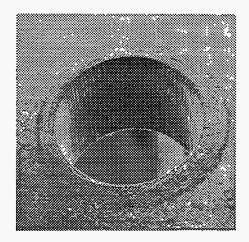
Hole Drilled (1.5 mm) in Diamond Using Nd:YAG Laser.
